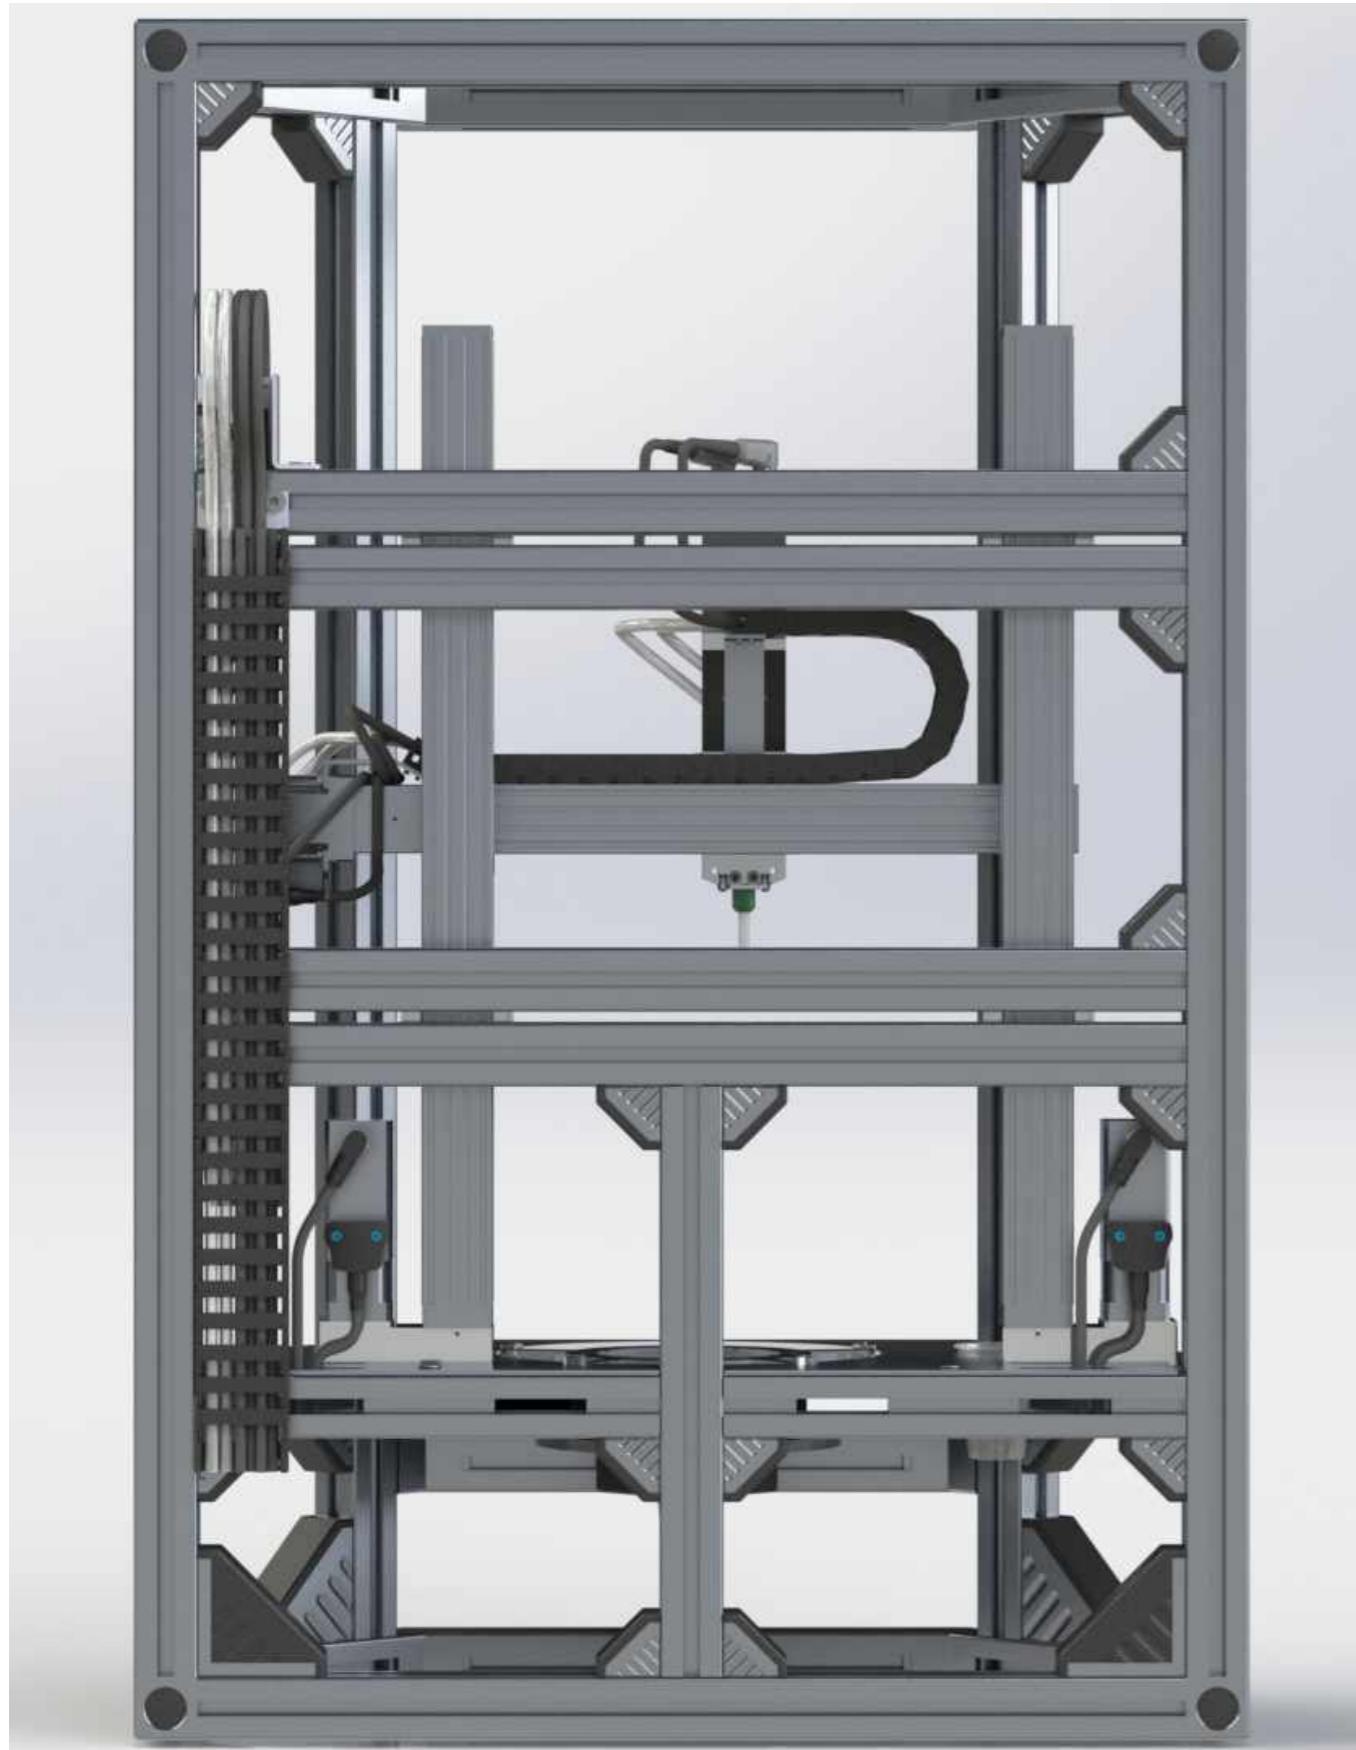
Rear of the 3D printer with EC, tubes and wires
